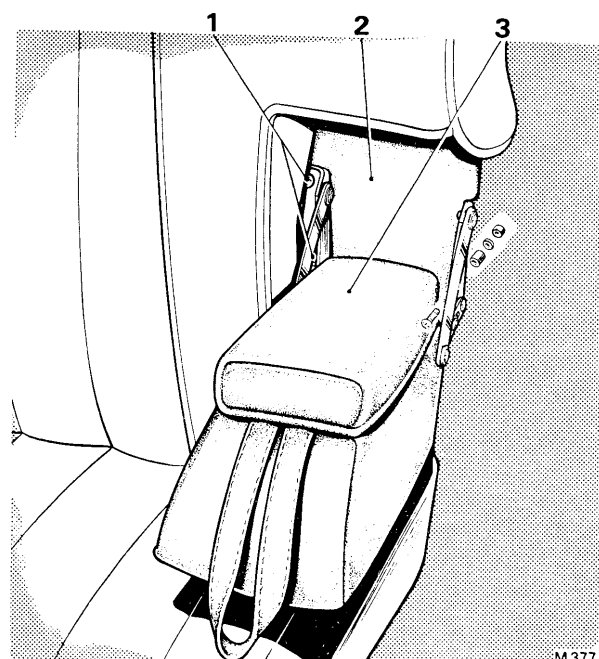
FRONT SEAT ARMREST (4-Door Saloon and Long Wheelbase Cars after Car Serial Number 6000)
